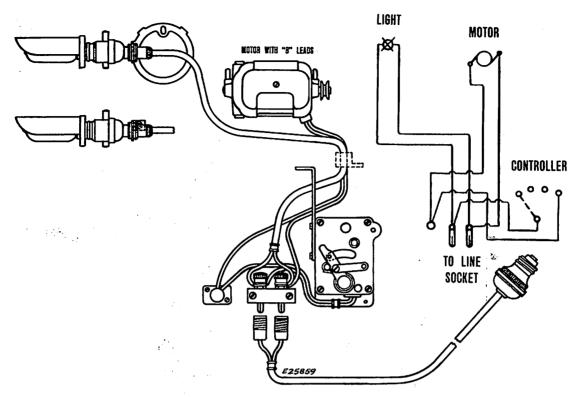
Wiring Diagram for BU3B to BU92B Motors on 66-6 Machine in Cabinet Set No. 20
